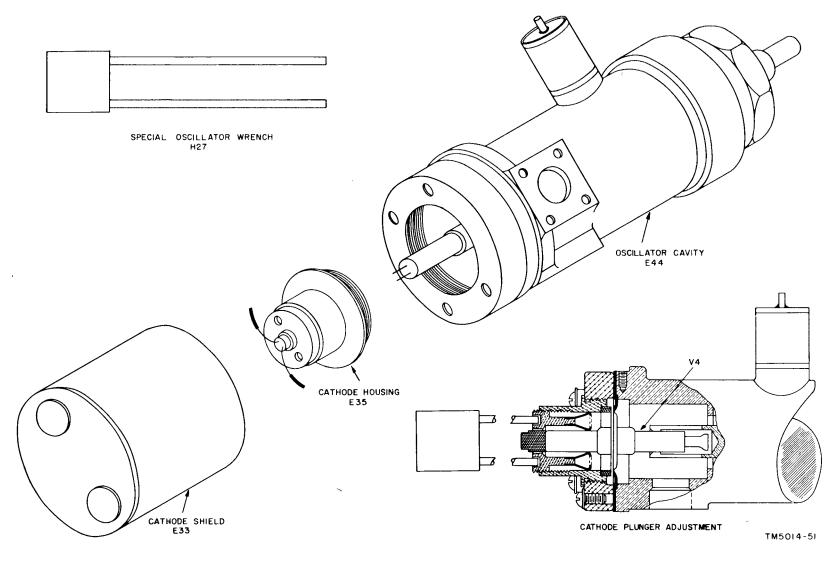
Test Set TS-538C/U, use of special oscillator wrench.
